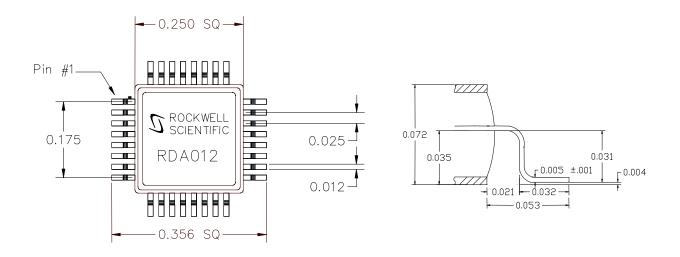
Metal-Ceramic Quad Flat Pack (QFP) with lead form. All dimensions are shown in inches, with tolerance  $\pm 0.002$  inch.
